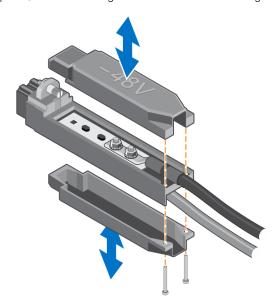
Attaching each -48V and RTN housing, tightening the screws on the RTN side
